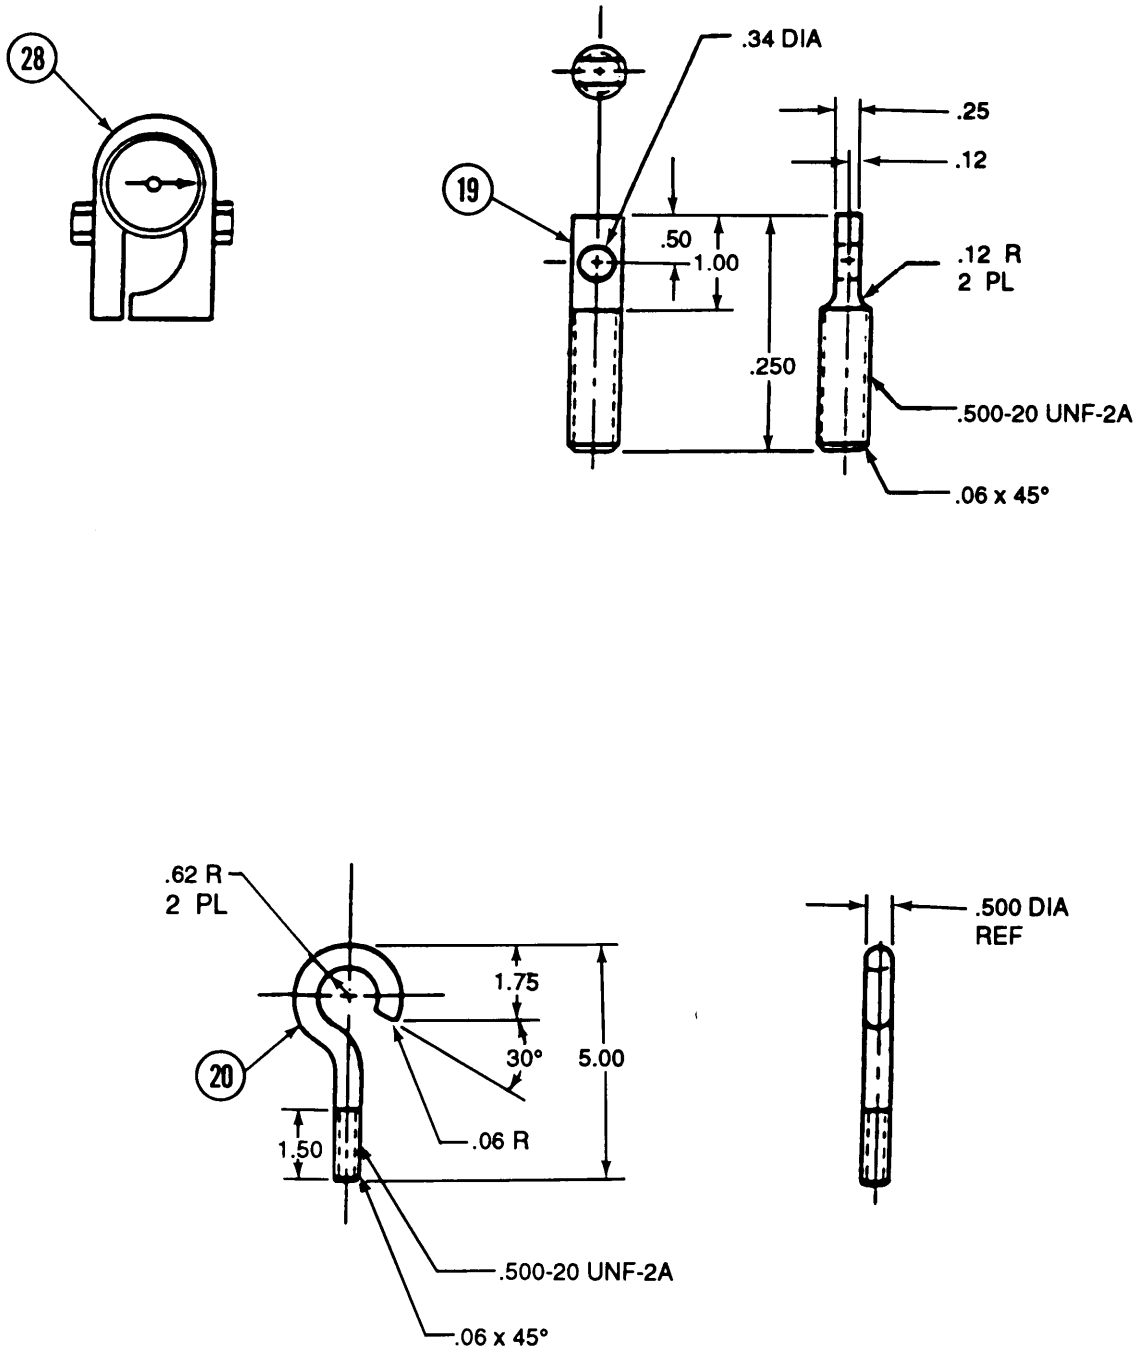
Projectile Rack Section Test Stand (2 of 2)
